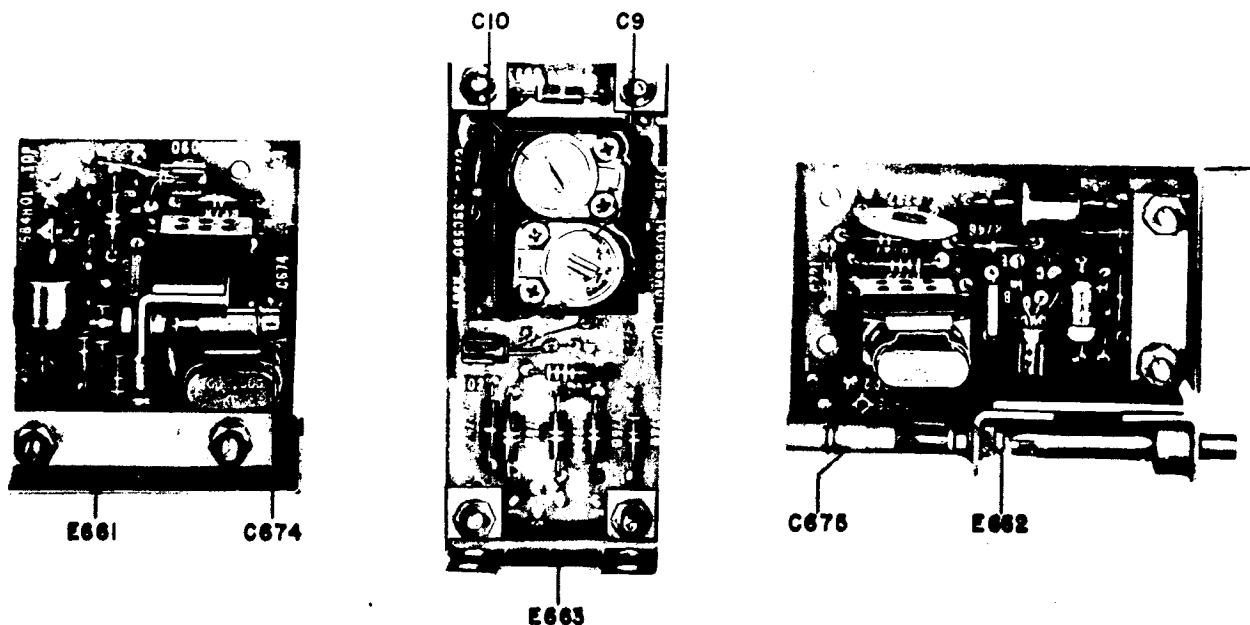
Electrical Frequency Control C-2861/WRT-1, Electrical Adjustments on Printed Boards E661, E662, E663
